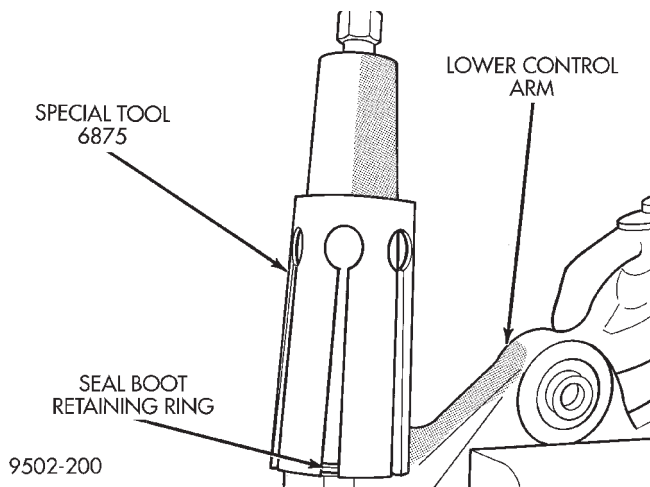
Retaining Ring Installed In Ball Joint Seal Boot
